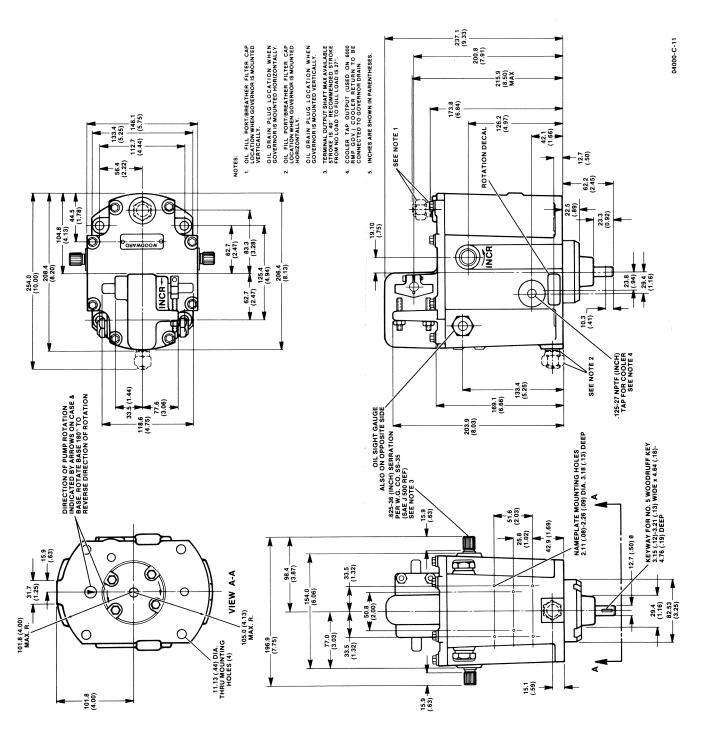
TG-13/TG-17 Outline Drawing Lever Speed Setting. Die-Cast Aluminum Case. Do Not Use For Construction
